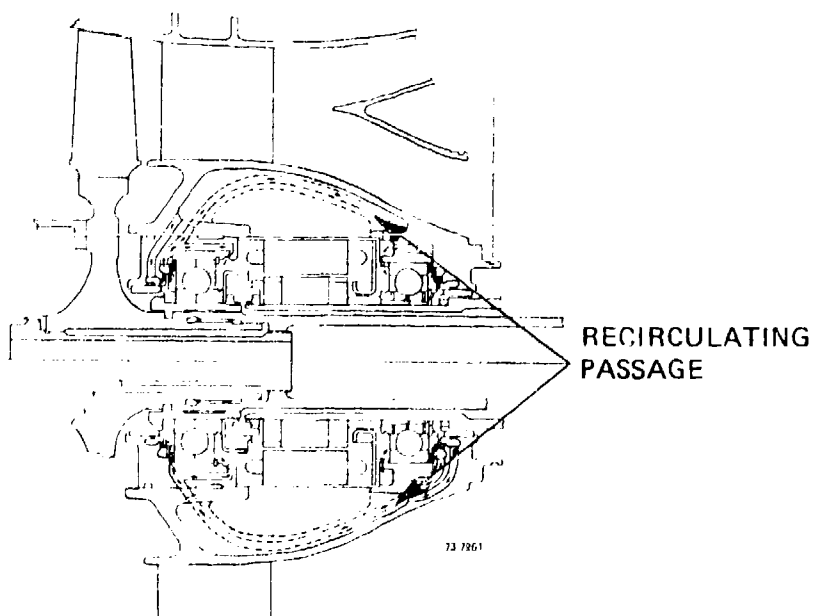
Typical Teledyne CAE Front Bearing Wet Oil Sump Lube System.
